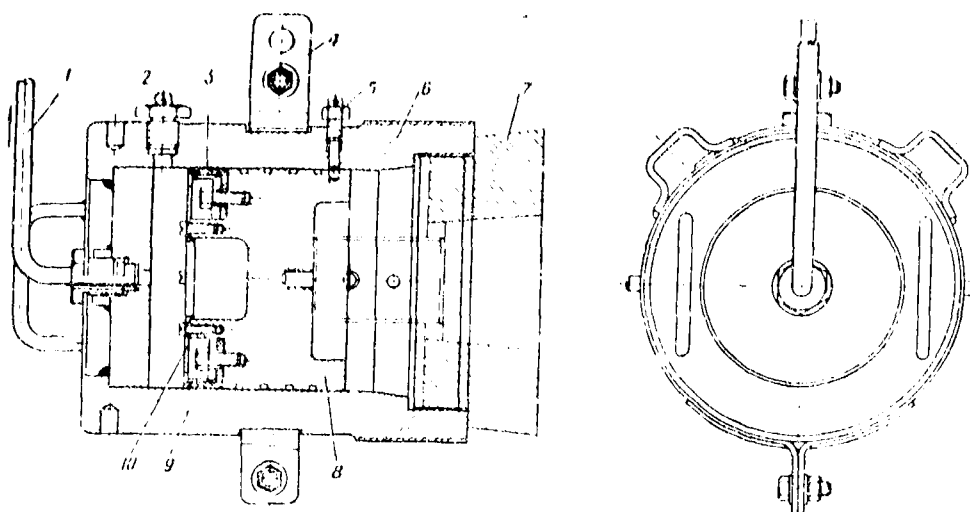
Hydraulic Piston-Type Puller for Removing Propeller Screw: 1 - red copper tube to the hydraulic pump; 2 - plug; 3 - leather packing ring; 4 - clamp made from two halves with eye bolts; 5 - set bolt; 6 - frame of puller; 7 - hub of the propeller screw; 8 - piston; 9 - spacing rings; and 10 - disk-type stop.
